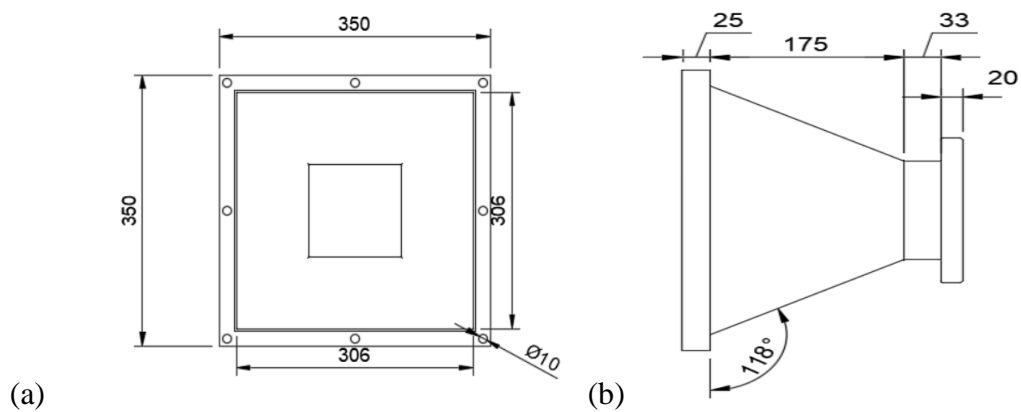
Dimensions of front view of contraction (a) and side view (b)
